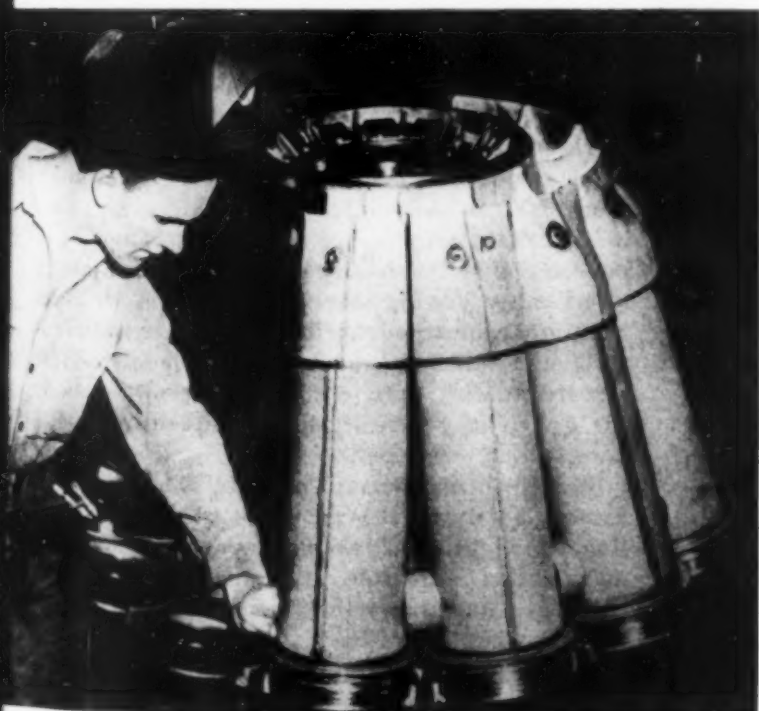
Nesting Inconel Combustion Tubes (for G.E. Engine in "Shooting Star") in Fixtures Prior to Welding Together Into a Single Unit. Courtesy I.T.E. Circuit Breaker Co.
